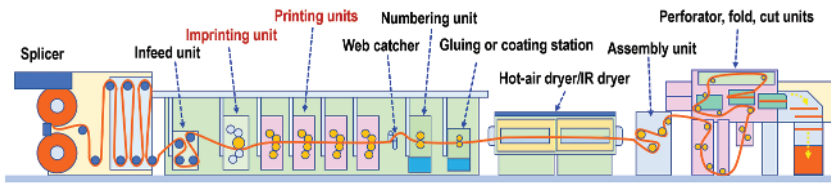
Schematic illustration of the printing electronics can be fabricated by roll-to-roll printing press and in-lined with other functional units, such as drying, coating, assembly, folding, and so forth.
